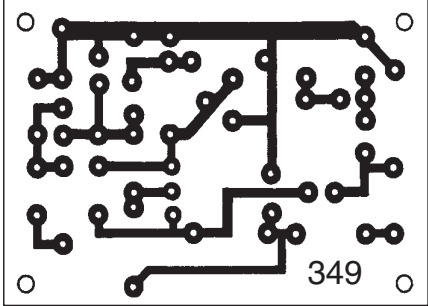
Printed circuit board component layout, wiring and full-size copper foil master pattern for the Low Input Impedance Preamplifier.
